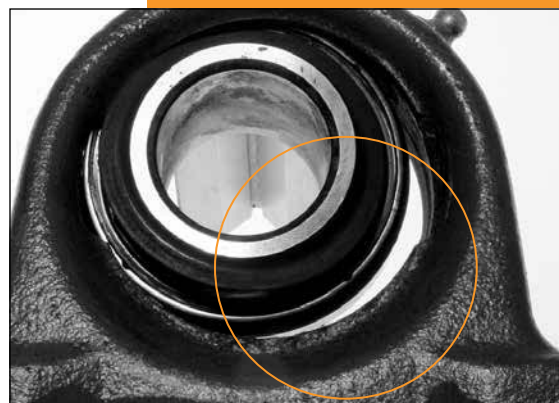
Exposure to abrasives and water in a severe environment caused extreme wear on this pillow block bearing
